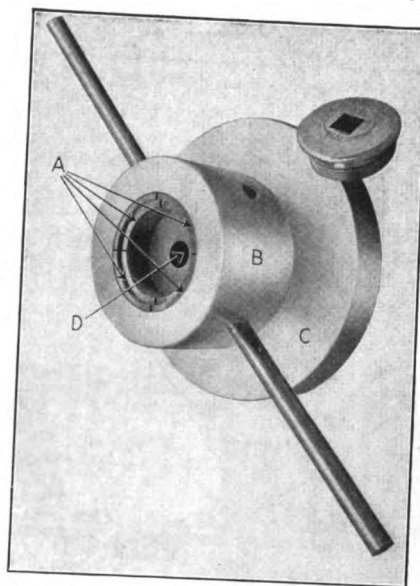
CHUCK FOR SHRAPNEL PLUGS
